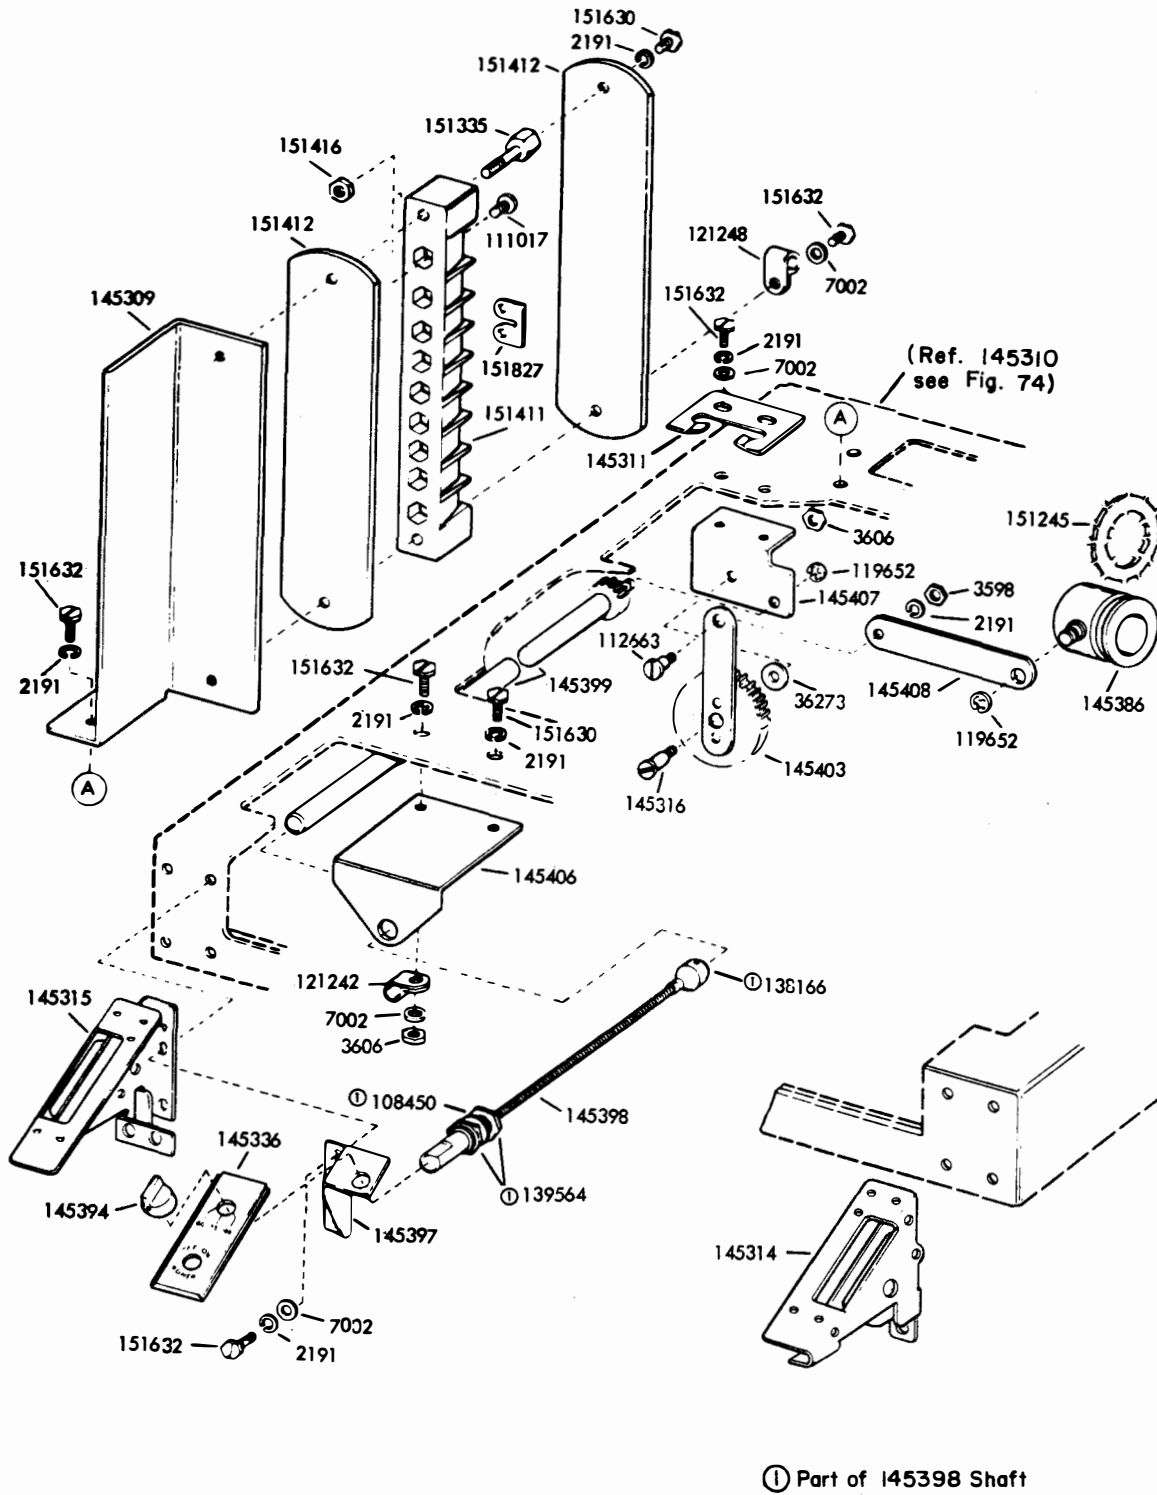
Gearshift Mechanism for Tape Printer Keyboard Base - Used on High-Level Sets (Sheet 2 of 2)
